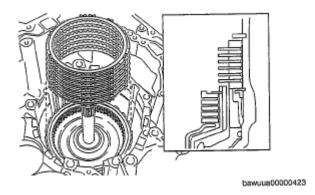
Identifying Driven Plates, Drive Plates And Retaining Plate Courtesy of MAZDA MOTORS CORP.
